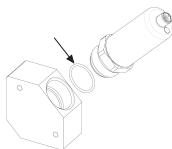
Example for the installation of an L-Rix 2100 refractometer with the O-ring 25x2 FVMQ 70 BU
